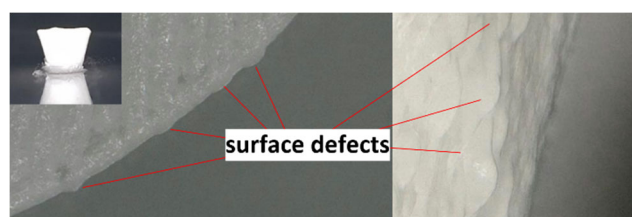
Surface defects due to misfiring jets on a printed inverted cone with 14° overhang - top and side view (right) - MH2910F
